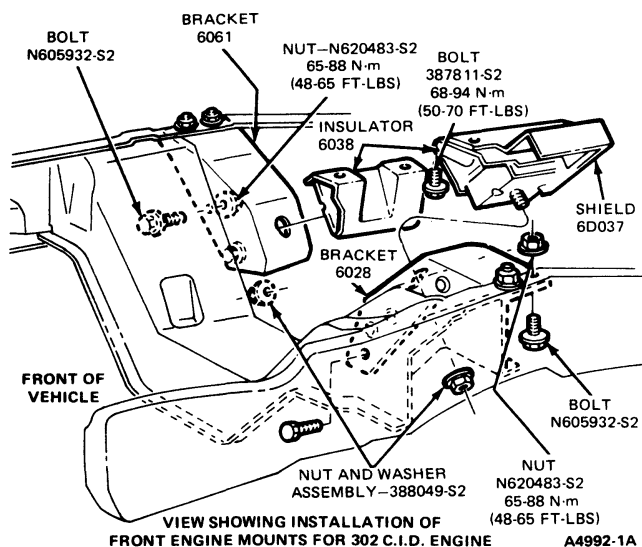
Engine Front Supports—F-100, F-250—Bronco
